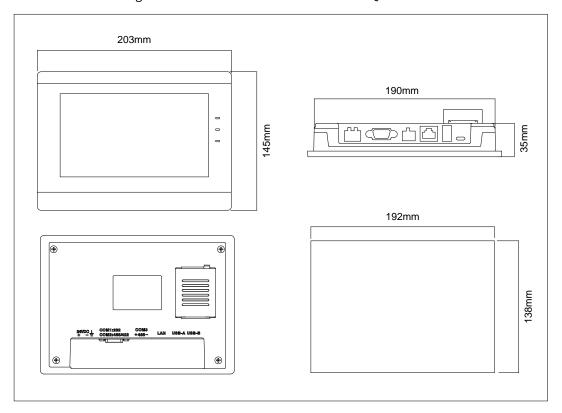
Installation dimensions of VS070QS-1618MDM1
